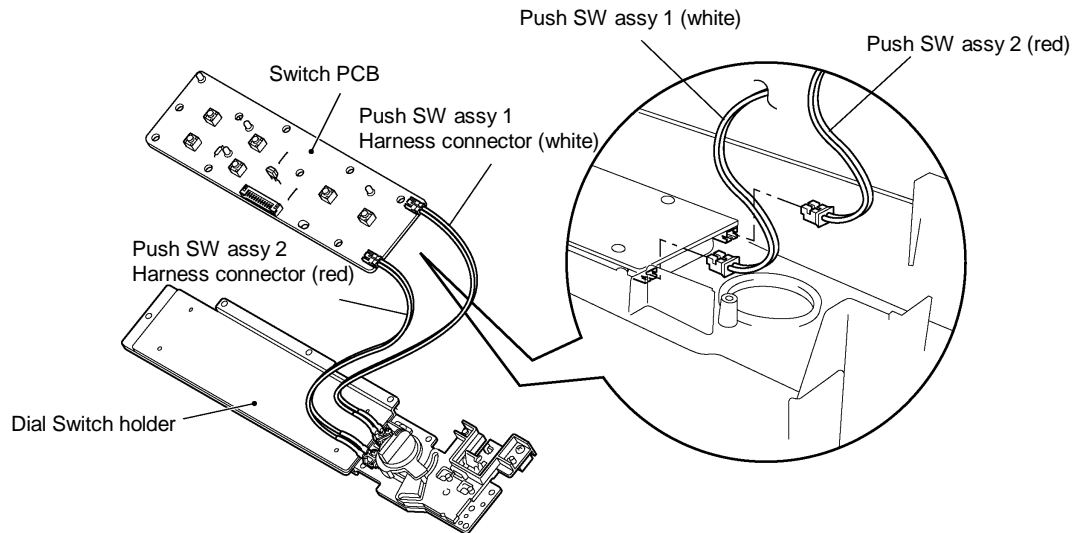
Installing the Dial Switch Holder Assy 1
